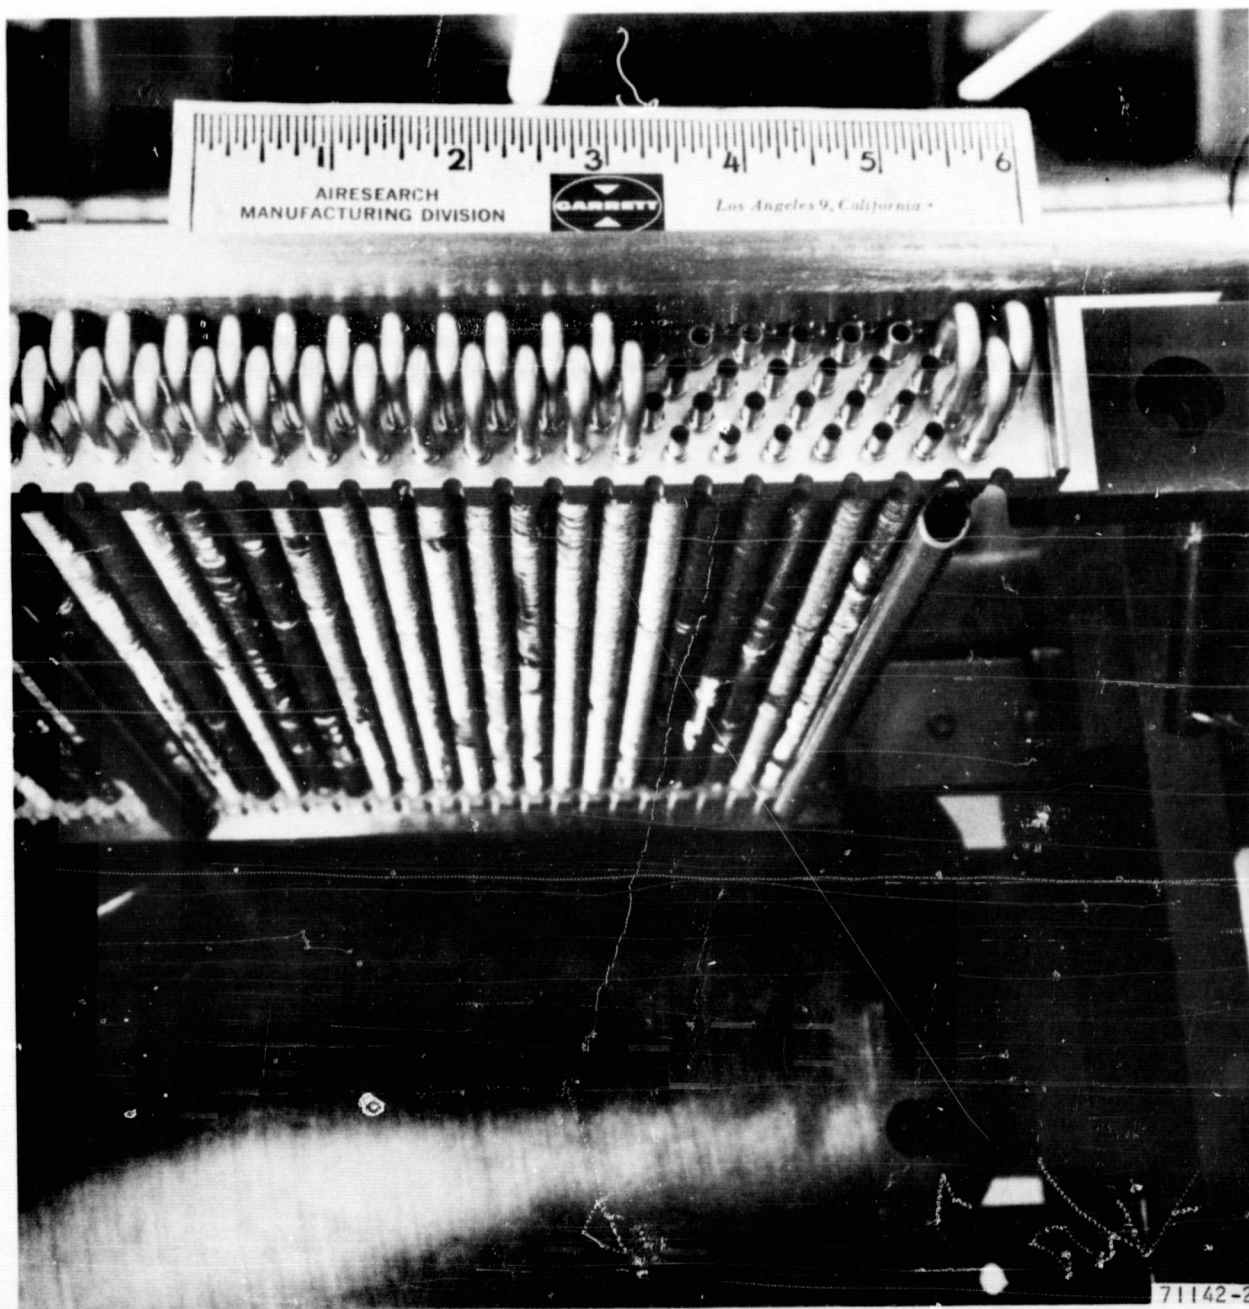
378 Finned Tube Test Specimen with Liquid Manifold, Return Tubes and Headers in Position
